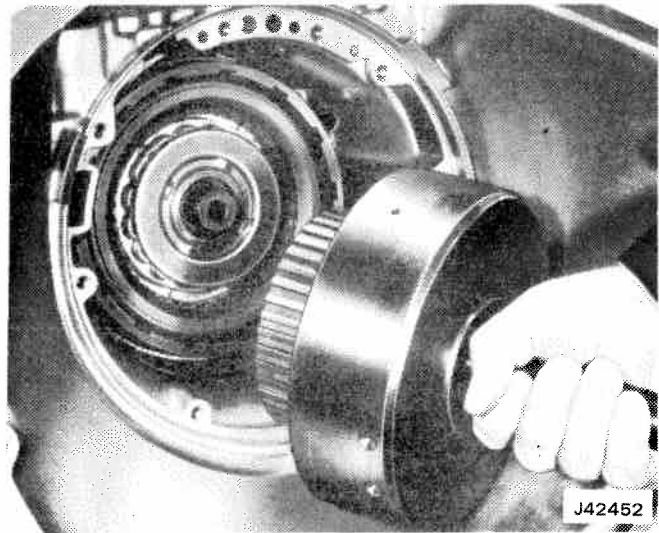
Removing-Installing Forward Clutch Assembly
